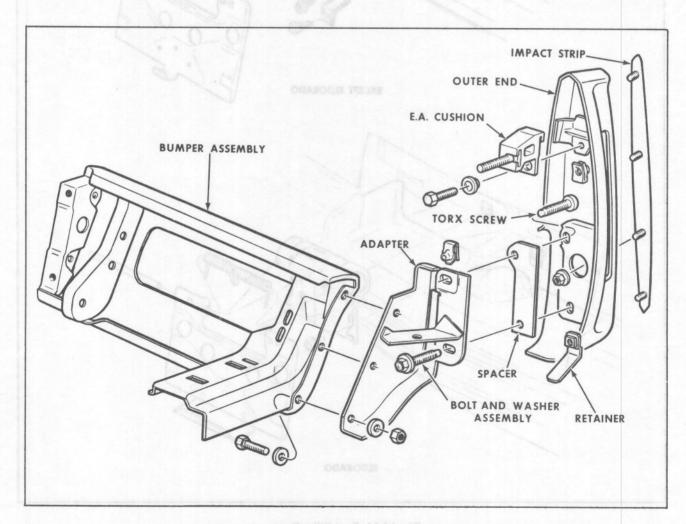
Rear Bumper Disassembled-Commercial Chassis
